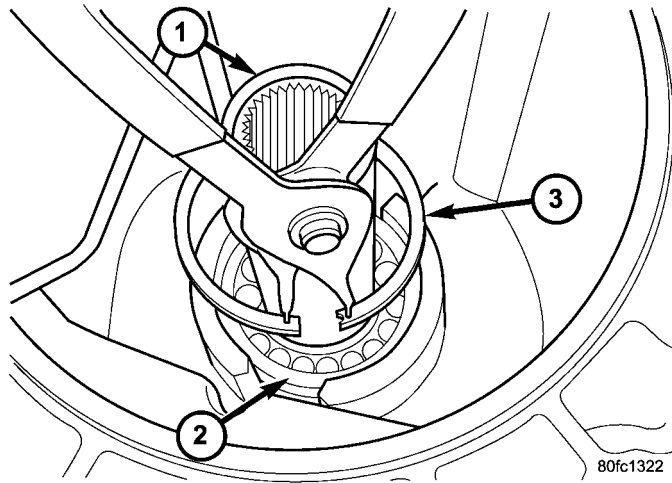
Remove Extension Shaft Bearing Snap Ring
